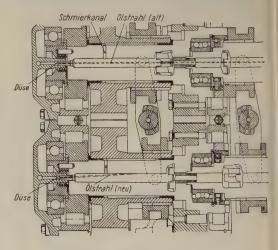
Lubrication of the hub support bush of the Maybach-Mekydro transmission. Formerly (shaft at top): the jet of oil projected through the axially drilled hole went through the whole length of the hollow shaft without lubricating the bearings. Today (bottom shaft) the jet of oil is automatically projected against the hole in the shaft by the obliquely drilled hole and thus penetrates into the lubricating channel of the bushes.
